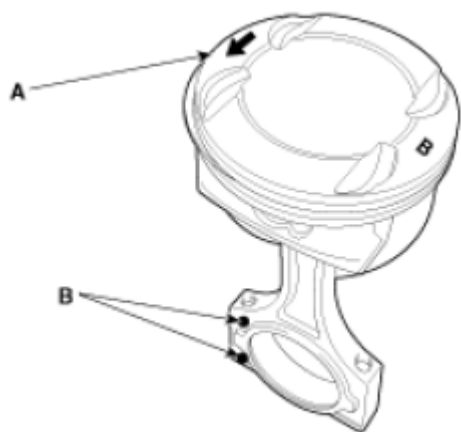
Identifying Piston And Connecting Rod Front Mark
